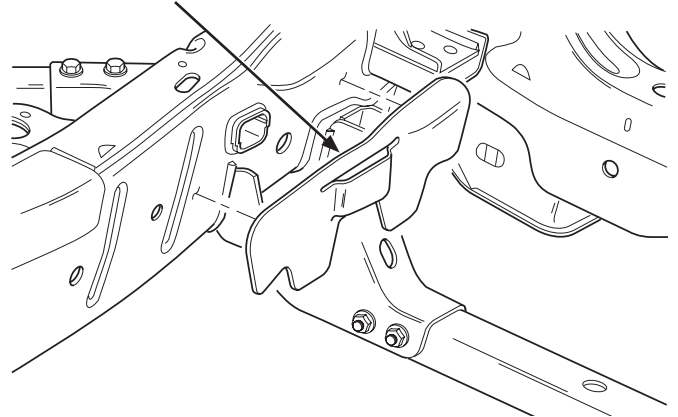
REMOVE CLEAR BACKING FROM SHIELD PRIOR TO INSTALLING. THE FOIL FACE FACES AWAY FROM THE FRAME RAIL. (LH SHOWN, RH IS SYMMETRICALLY OPPOSITE)
